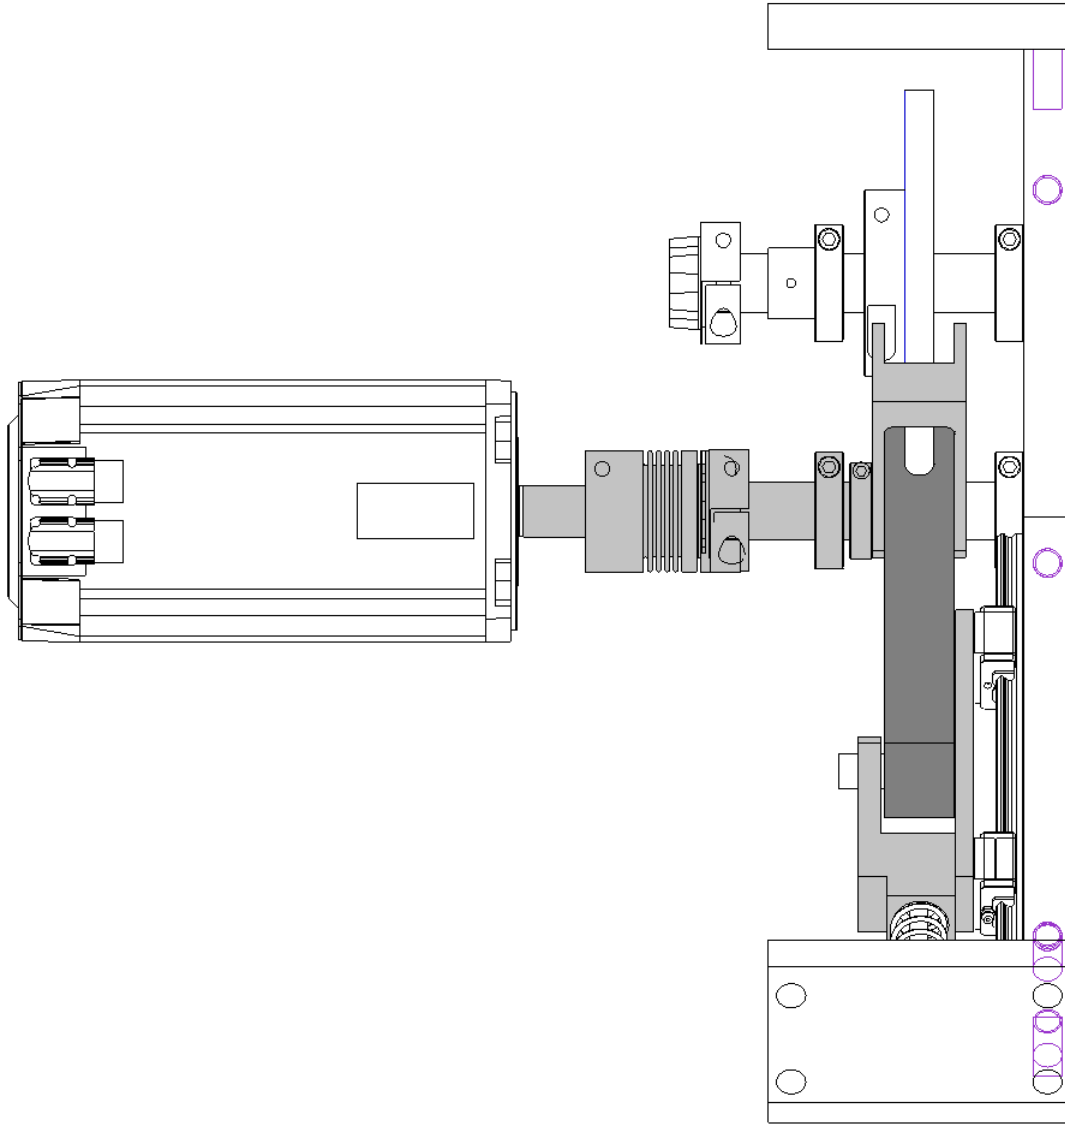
Direct-Drive Cam-Servo Test Machine Assembly, Top View
